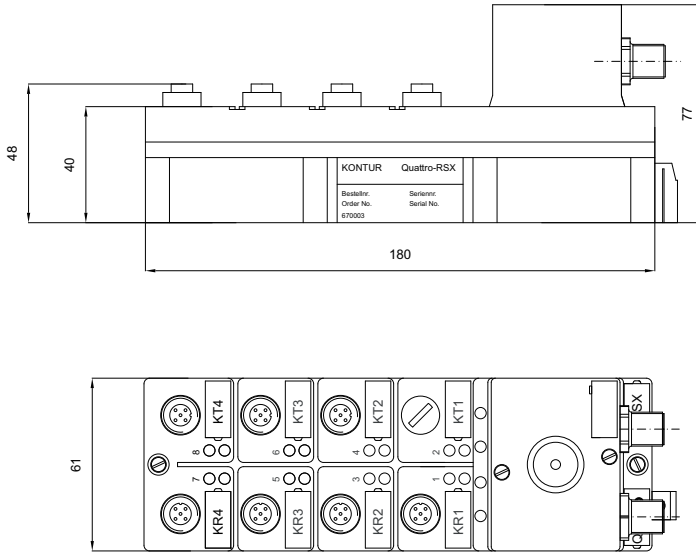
Dimensioned drawing of the QUATTRO-RSX/M12 control device
